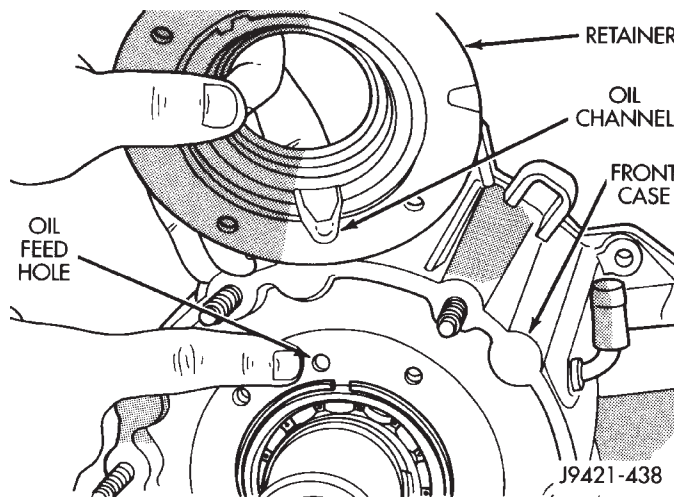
Retainer Oil Channel And Case Oil Feed Hole Locations
